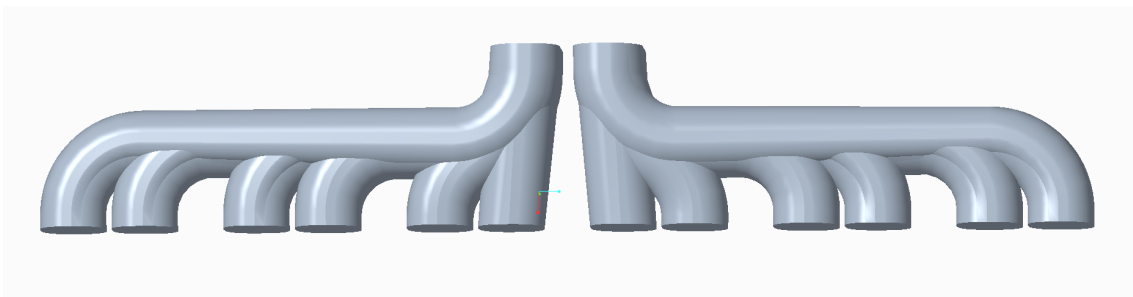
CAD of Mid Mounted Turbo Exhaust Manifold
